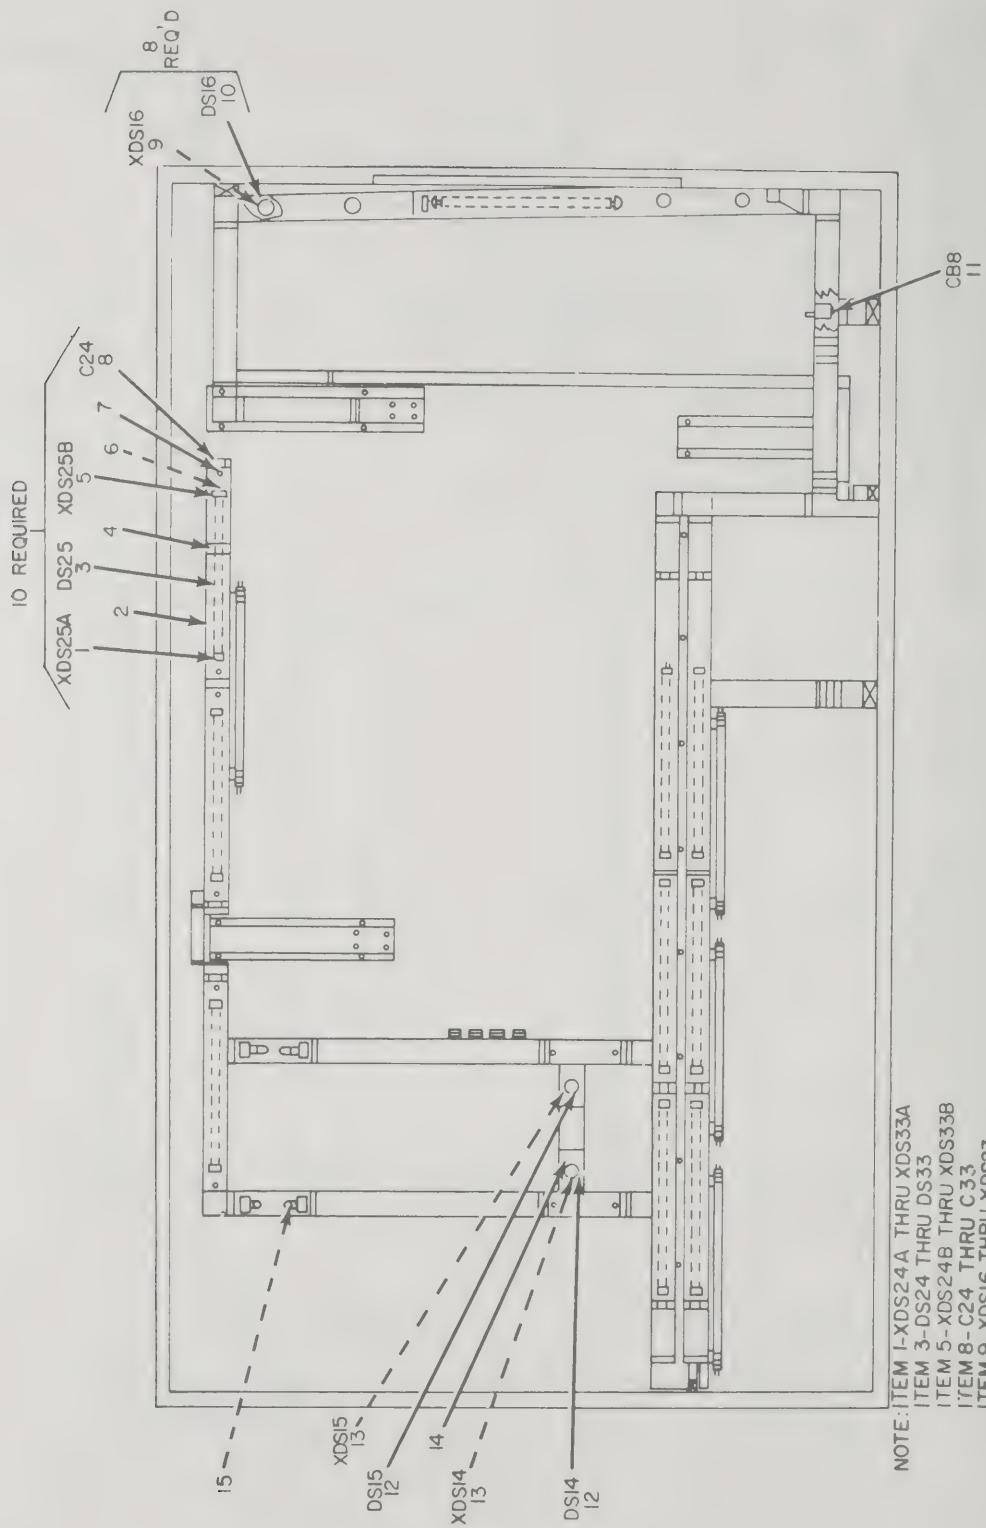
Shelter Facility S-376/TTC-23, Ceiling Plan.
